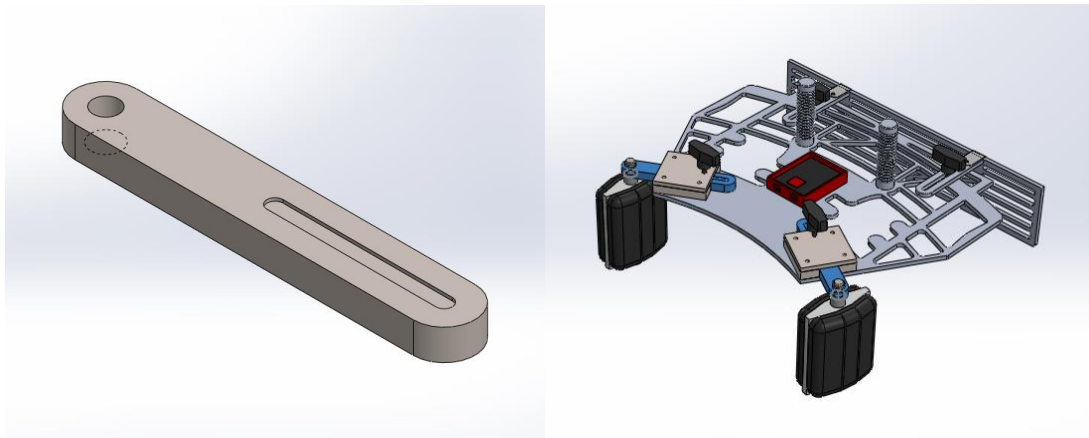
The SolidWorks model of the pad arm part (Left) and the integrated model where the pad arm parts are highlighted blue (Right).
